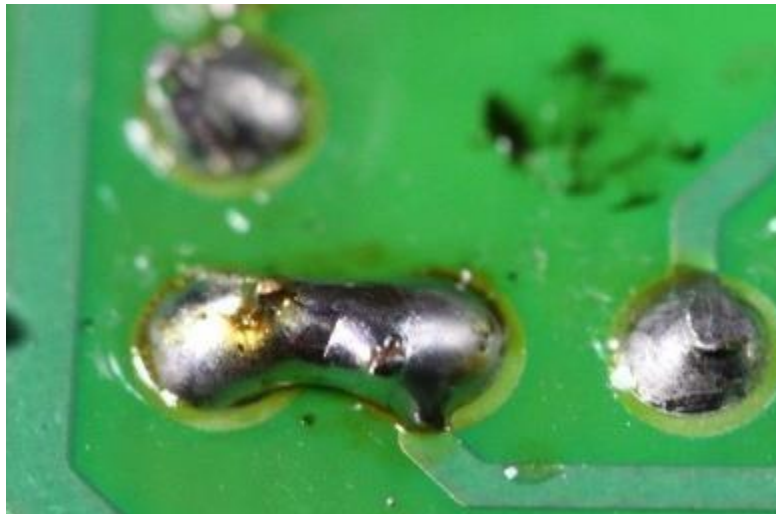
Formation of bridge type of solder due to excess solder and simultaneous melting of two joints together.
